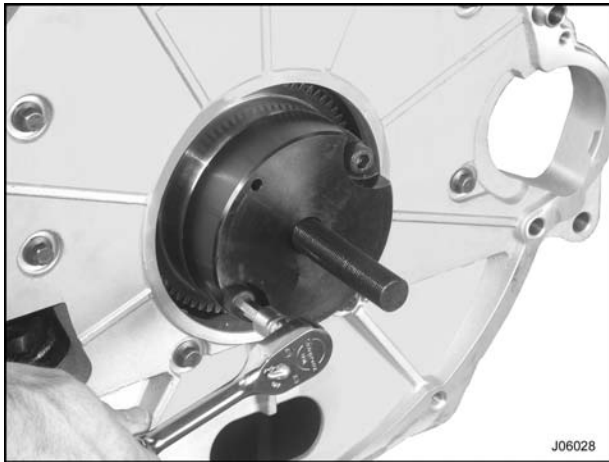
Installing the rear seal / wear sleeve installer (CF)
